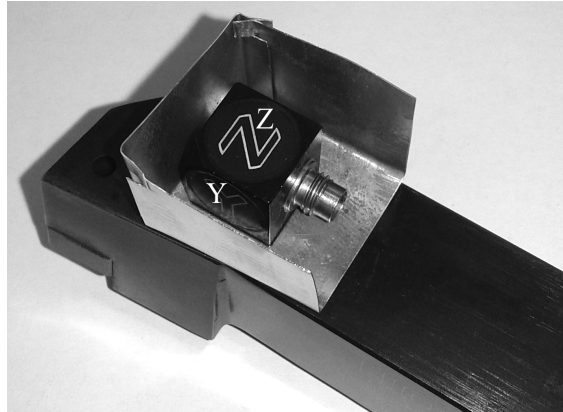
The lathe tool holder with the accelerometer attached. The sheet metal is a guard against chips. The axis of the accelerometer labelled “Y” in the photo is the radial direction ( $z$ ) in the coordinate system of the paper (Fig. 5.1).
